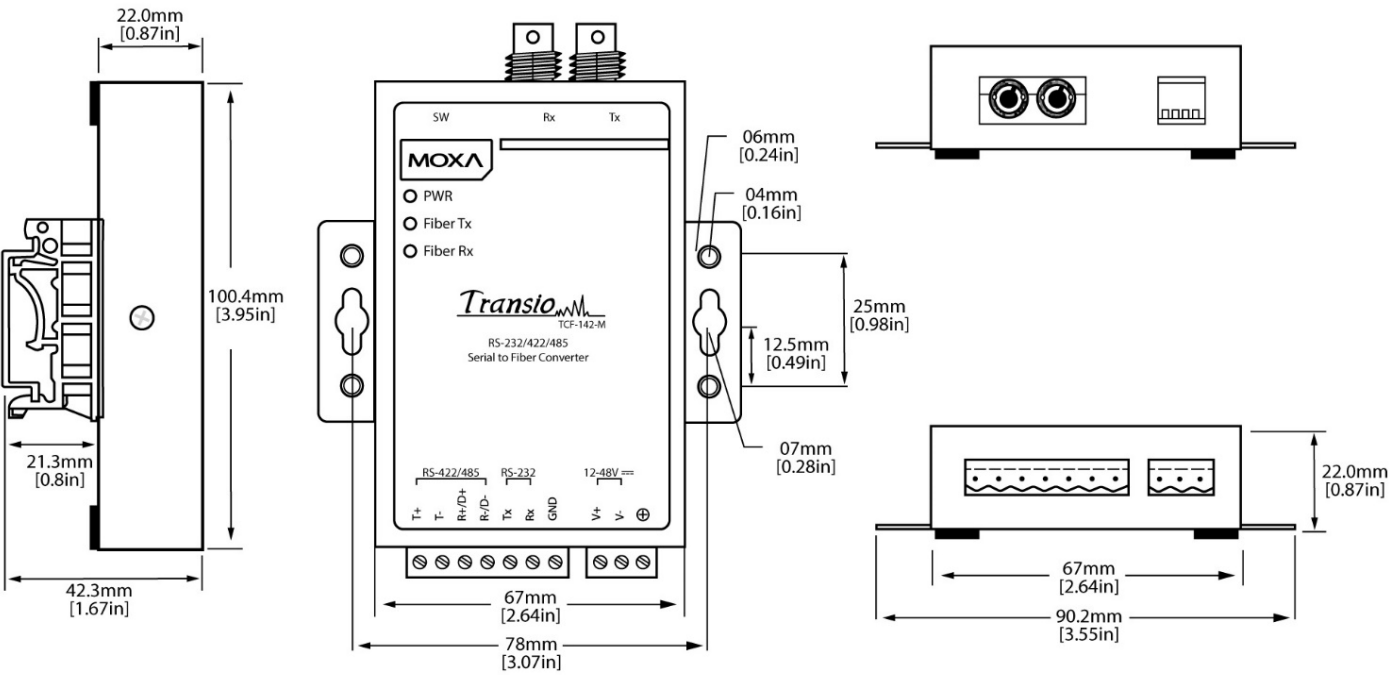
Dimensional Drawing: RS485 to fiber converter
